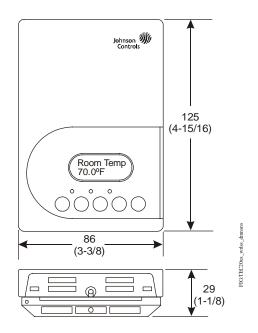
TEC Wireless Thermostat Controller Dimensions, mm (in.)
